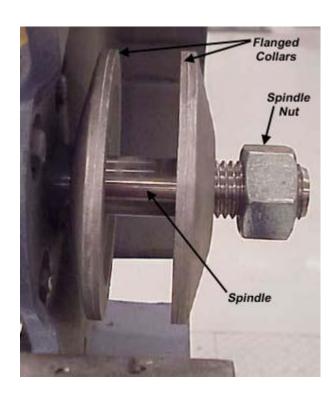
COMPONENTS / PARTS SECURING THE WHEEL.
